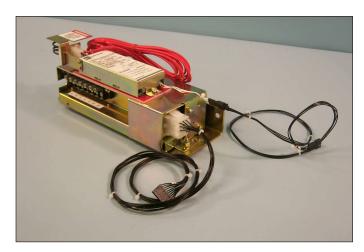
PT Module and Insulation Barrier Installed on the Aux. CT Module.
